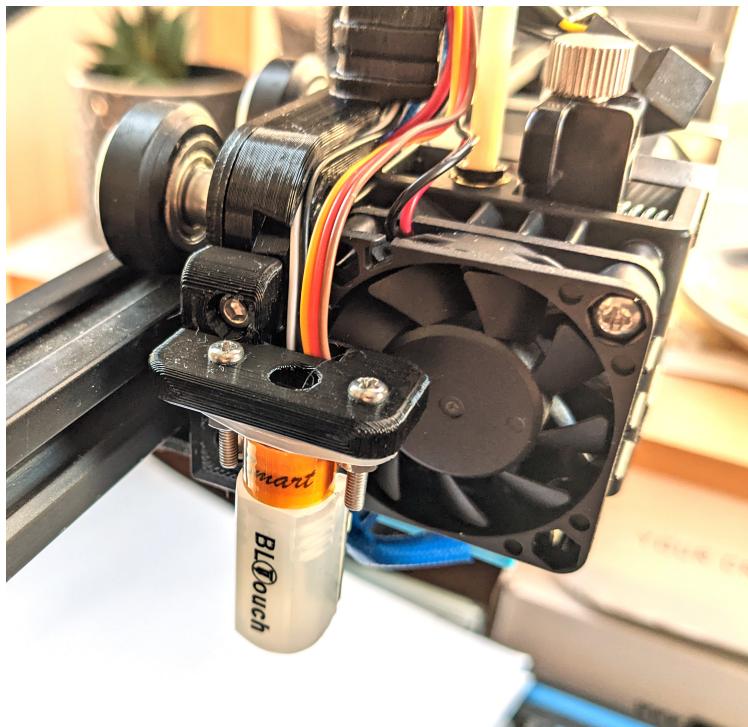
Attach the fan to the Hemera, then attach the BLTouch to the mounting bracket, then to the main plate.
